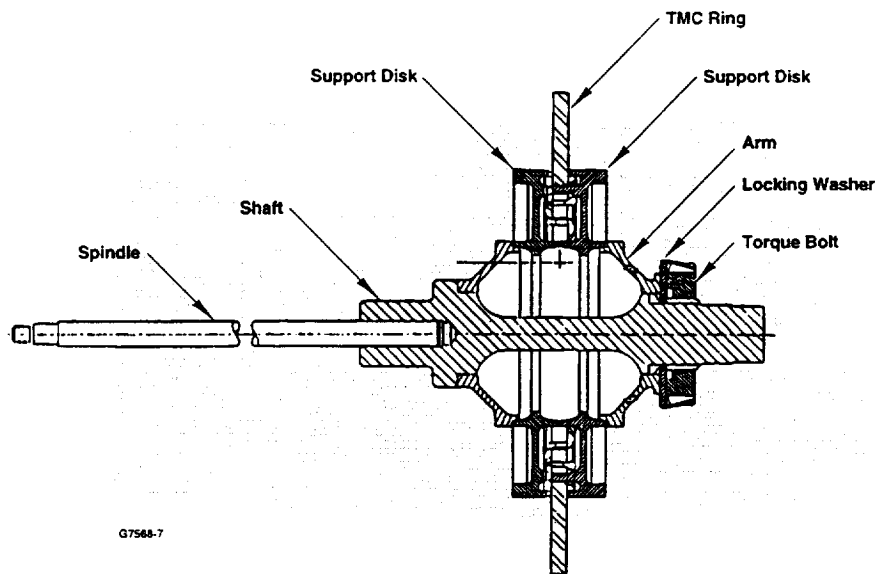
Cross-section Diagram of the Spin Test Arbor and TMC Ring Assembly.
